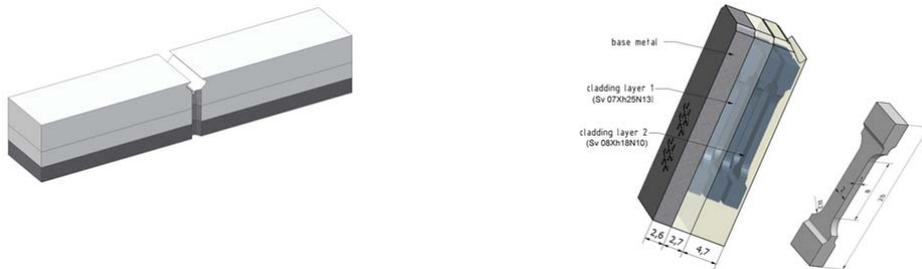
Charpy size SE(B) specimen and scheme of the machining of sub-size tensile specimens from broken halves.
